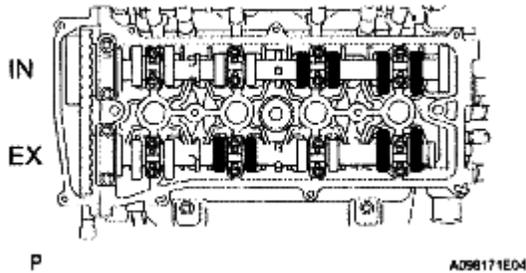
Measuring Clearance Between Valve Lifter And Camshaft
